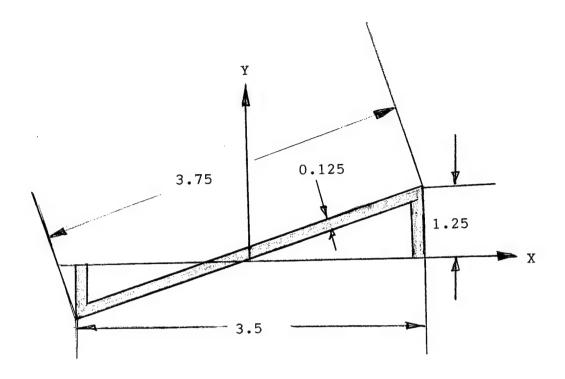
AA Thermoformed Boltaron Thermoplastic Corrugated Sheet Segment
